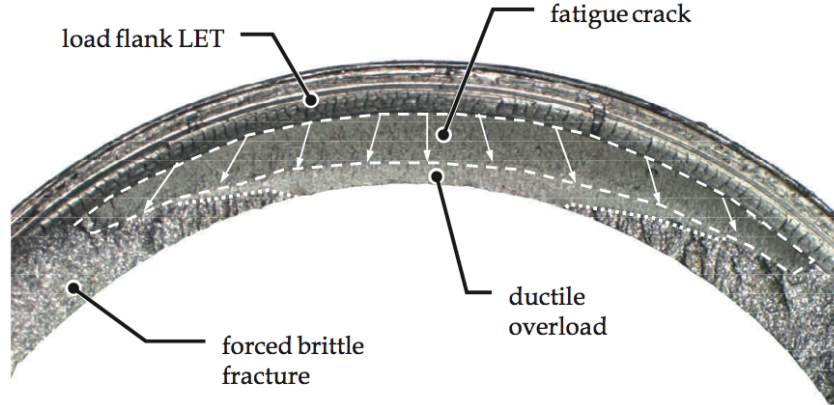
Fracture surface of a fatigue crack in a 1" API Line Pipe connection specimen taken from [54]
